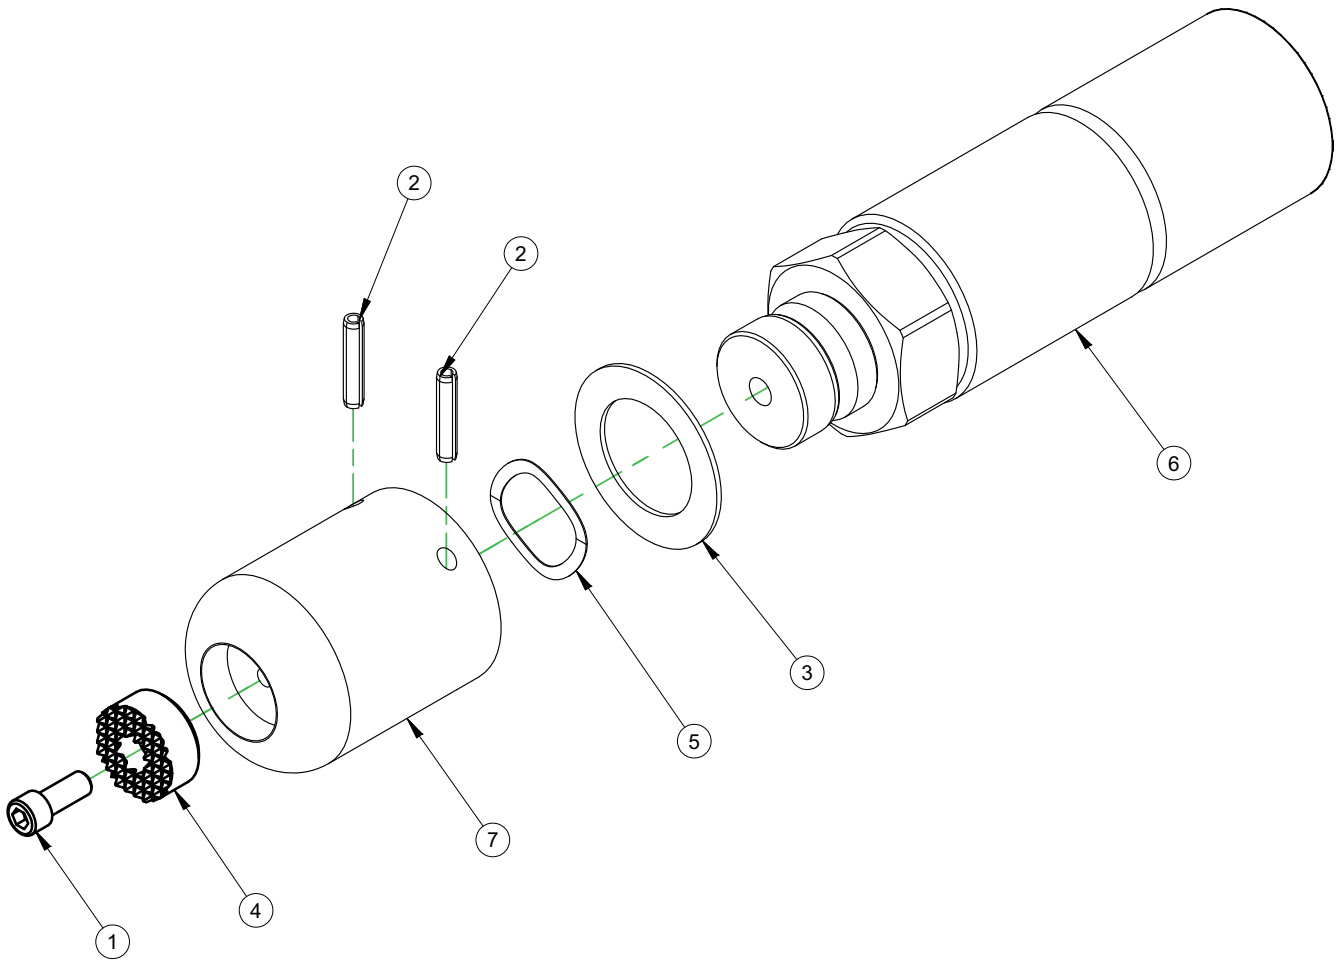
ID MOUNT ASSEMBLY (P/N 62038)
